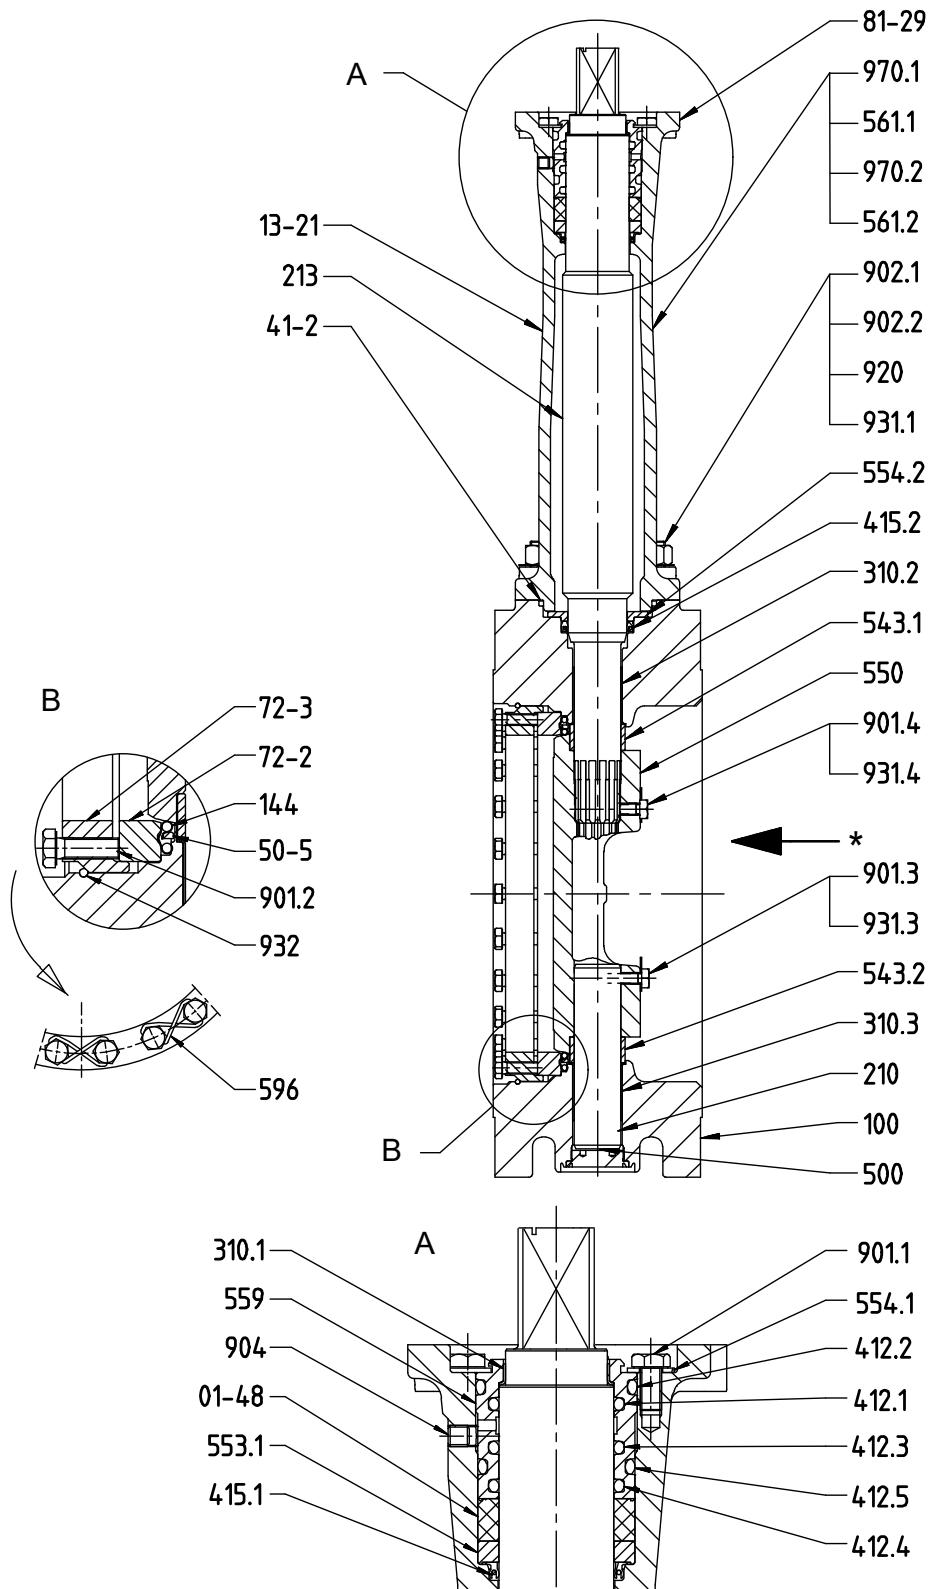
Sectional drawing of TRIODIS 150 CRYO T7 - DN 300-400 (12-16 inch)
